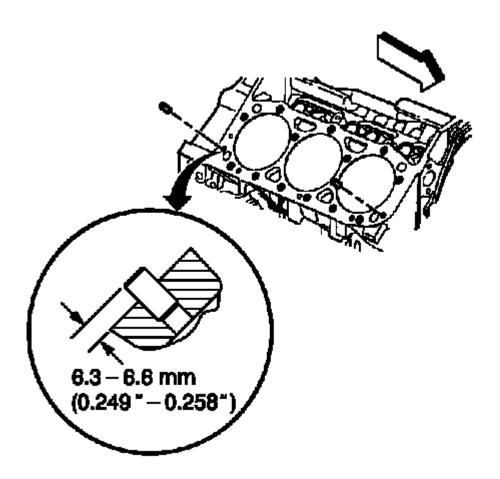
Installing Cylinder Head Locator Pins - Right Courtesy of GENERAL MOTORS CORP.
